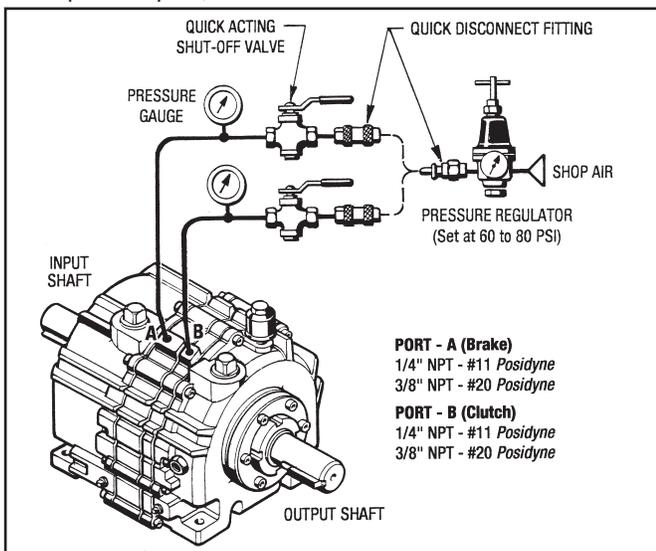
Pneumatic Testing Set-Up for Operational Check
